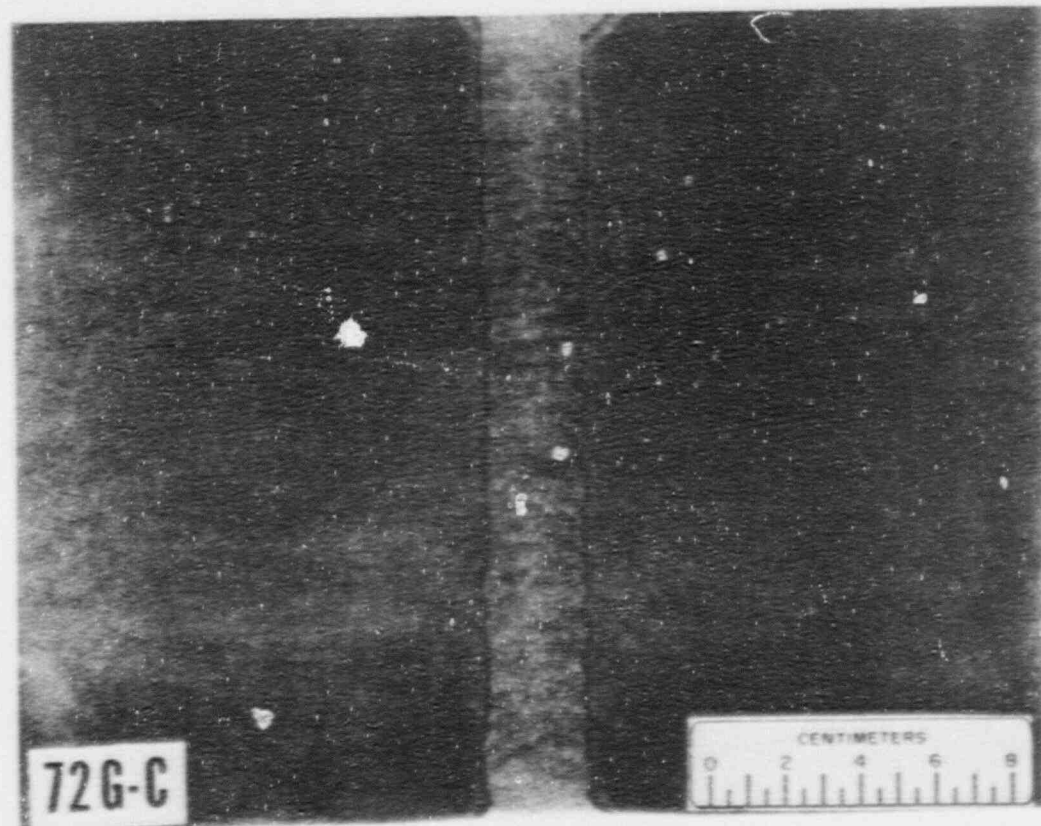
Cross section of typical submerged-arc weld used in the 72W and 73W welds used in the Fifth and Sixth Irradiation Series.
